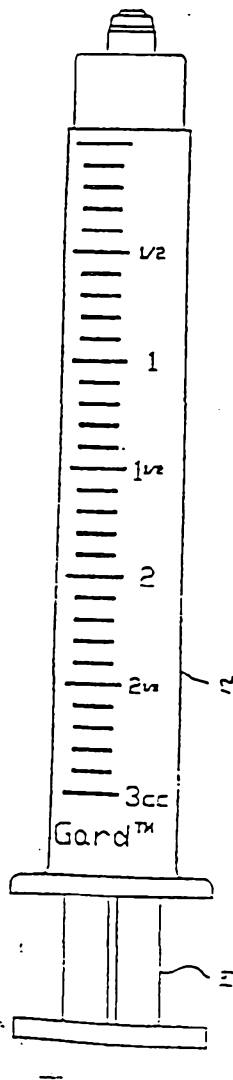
SIDE VIEW - TWO THIRDS ENGAGEMENT POSITION - STOPPER BOTTOMED
